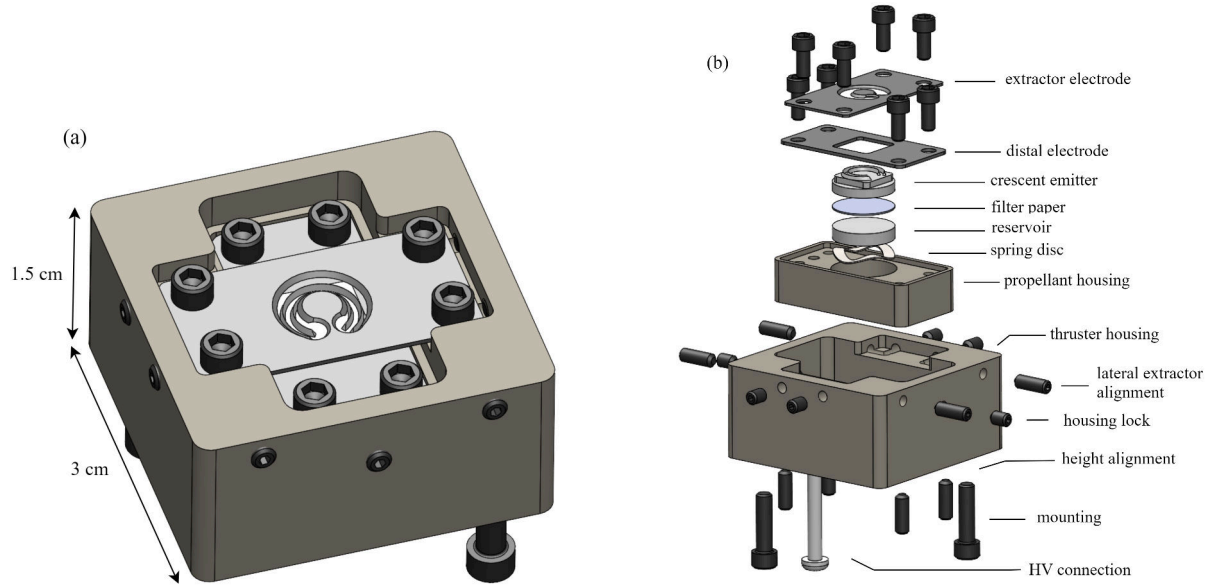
Assembled AFET-2 inspired thruster housing design with crescent wedge assembly prototype shown in (a) and in (b), the exploded view.
